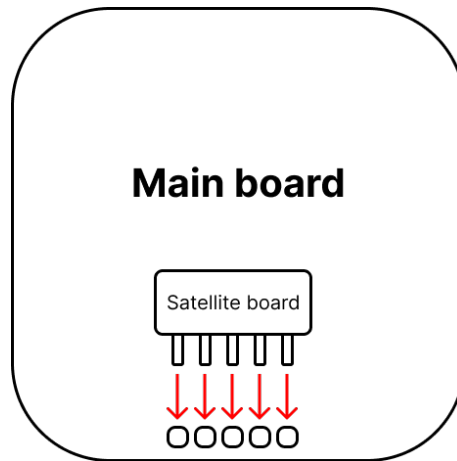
The satellite board would be mounted on the main board through connection holes, and then soldered in place.
